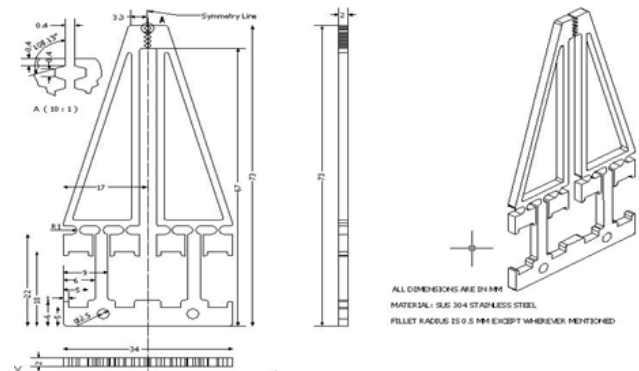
AutoCAD drawing of dual actuated micro-gripper
